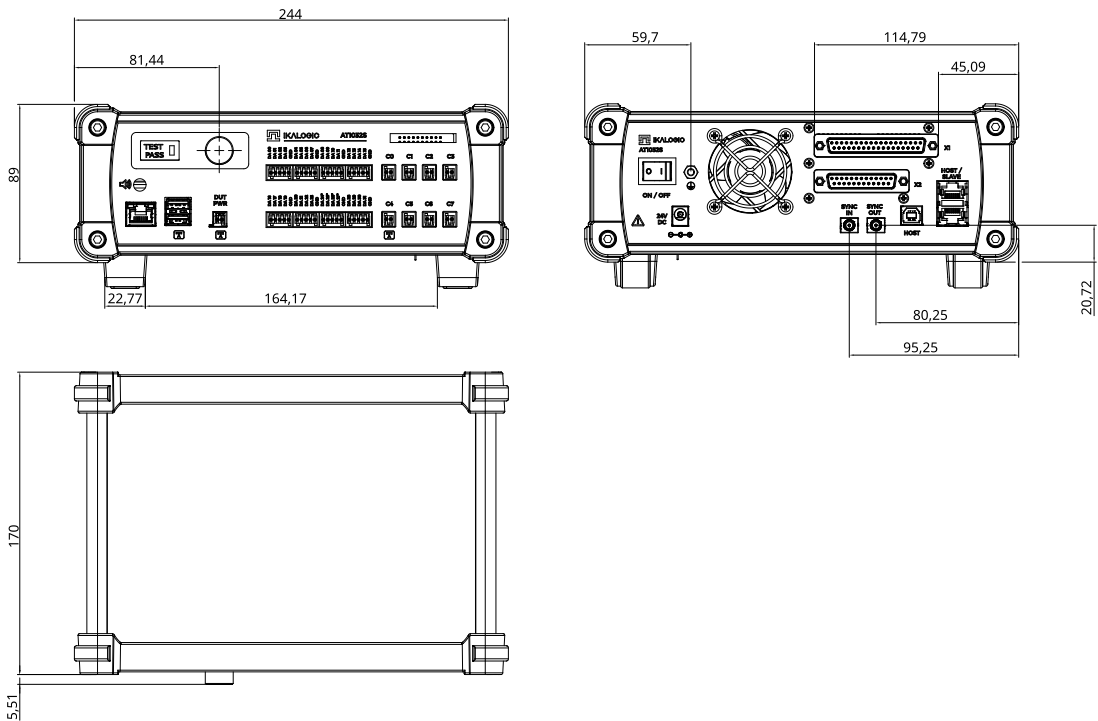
AT1032S Mechanical drawing (all dimensions in mm)
